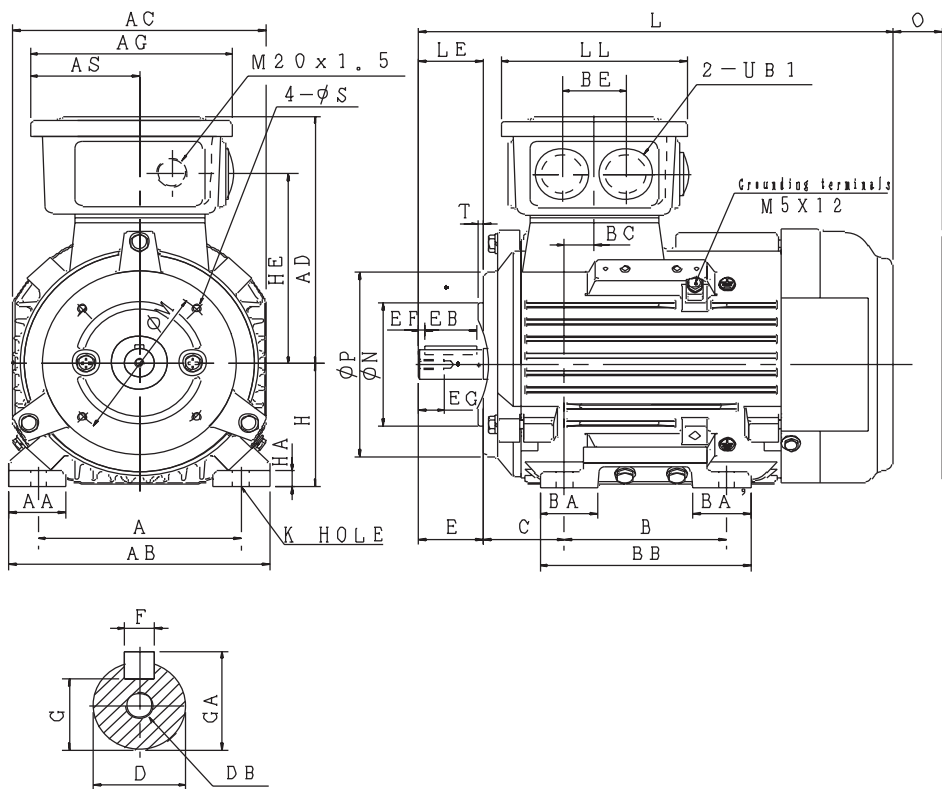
Outline drawing of cast iron design, feet version, mounting B34; frame size 80M - 112M
